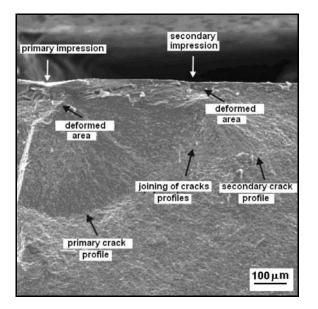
Fracture surface detail, specimen No. 2, couple No. 7.
